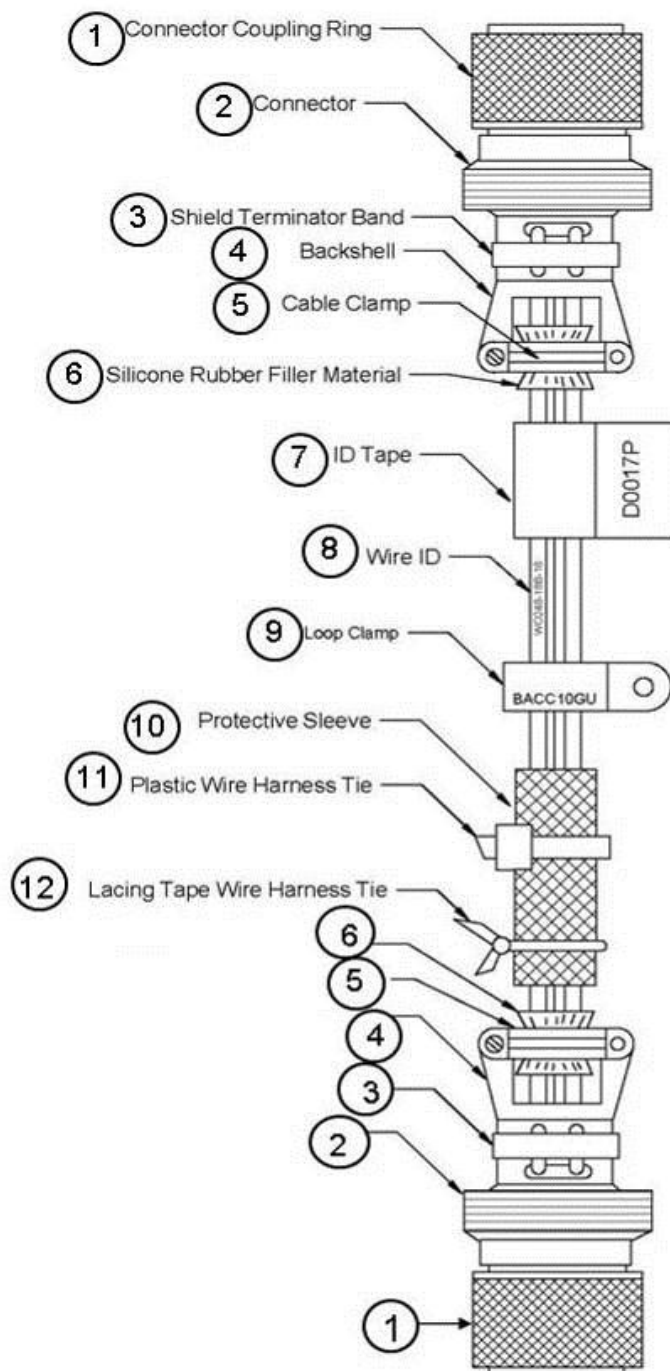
Example of a Cable Assembly Sketch, Showing all Parts and their Associated ID Codes for all parts
